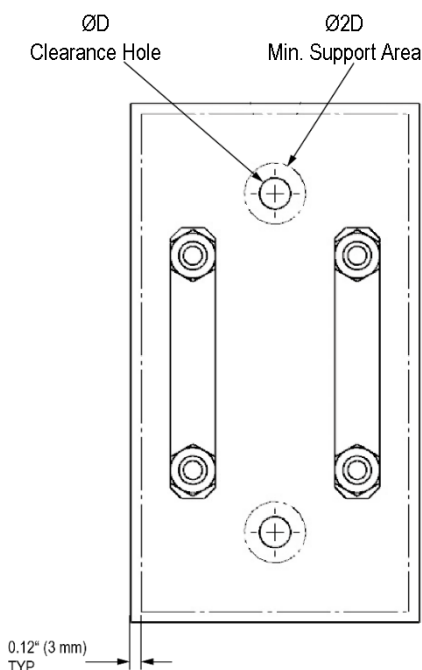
Bottom of base plate with illustration of the mounting holes and the minimum support area
